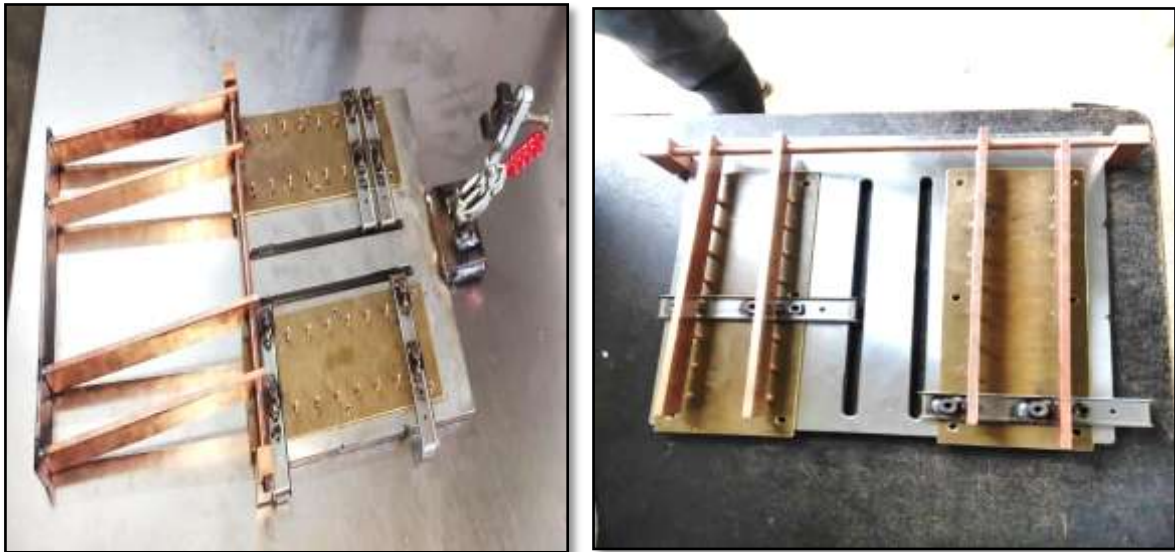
Tack welding fixture with Copper base plate with pins
